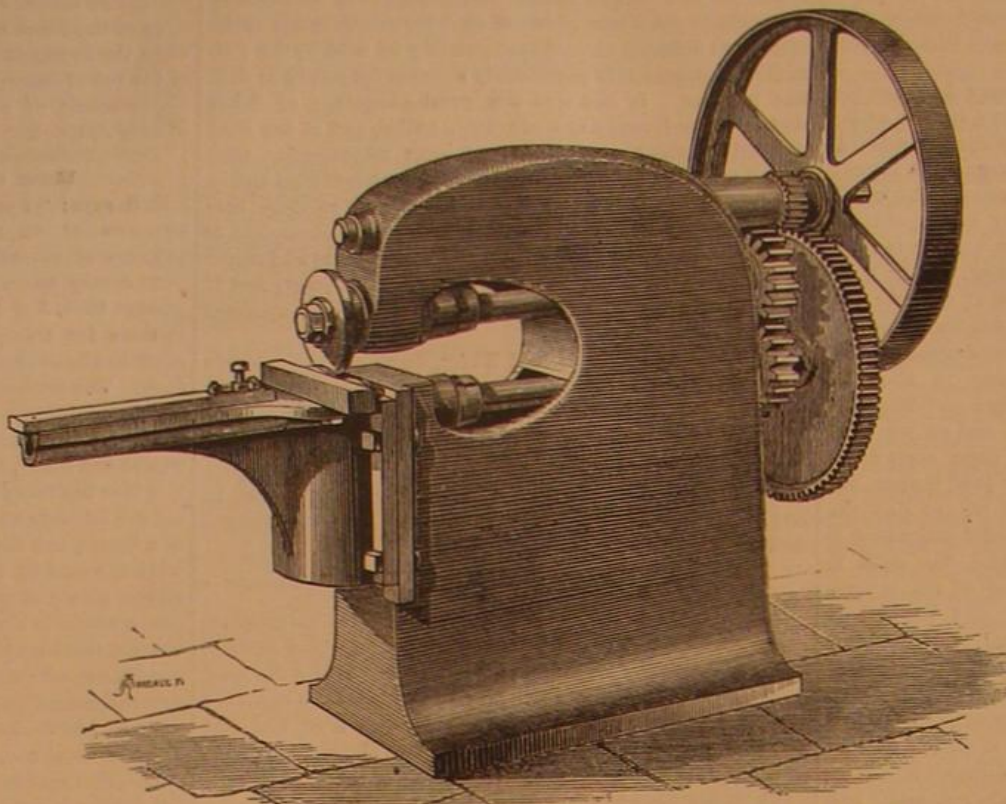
PLATE SHEARING MACHINE WITH REVOLVING CUTTERS.
